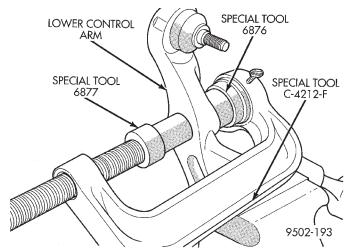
Removing Clevis Bushing From Lower Control Arm
